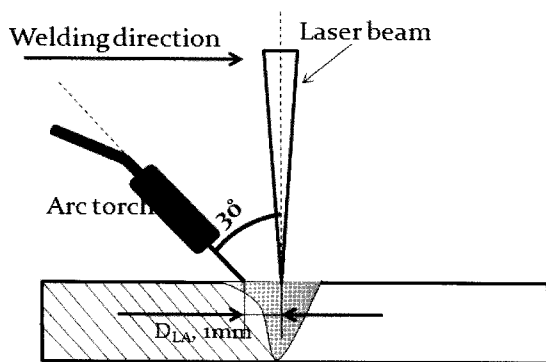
A schematic view of fiber laser-MIG hybrid welding
